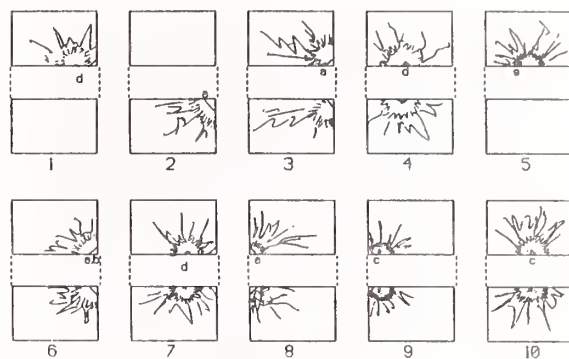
Drawings of fracture surfaces of specimens observed with optical microscopy.
